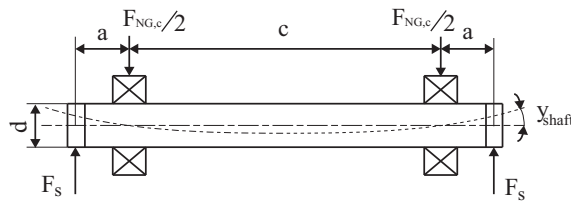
Schematic cutaway of an idler shaft assuming that the bearings do not transmit any moment.
